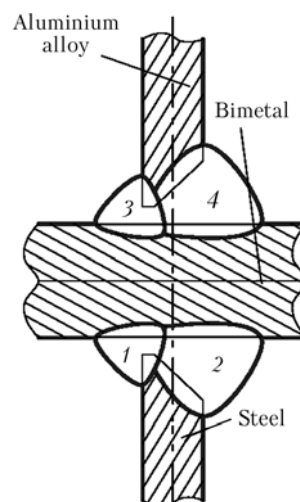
Scheme of T-joint of aluminium structure with the steel one produced using a bimetal transition pieces: 1-4 — passes in weld making
